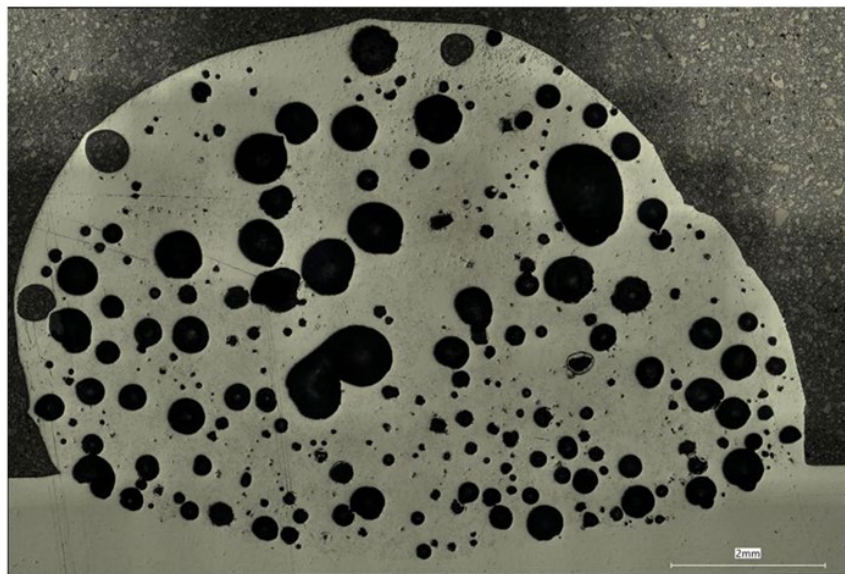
Cross-section of the first AMC weld seam under the optical microscope.
